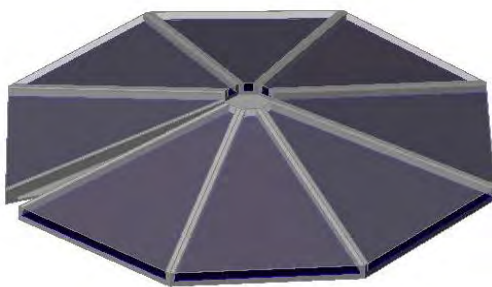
Final Storage Model Concept Design; 8 Panels Assembled
